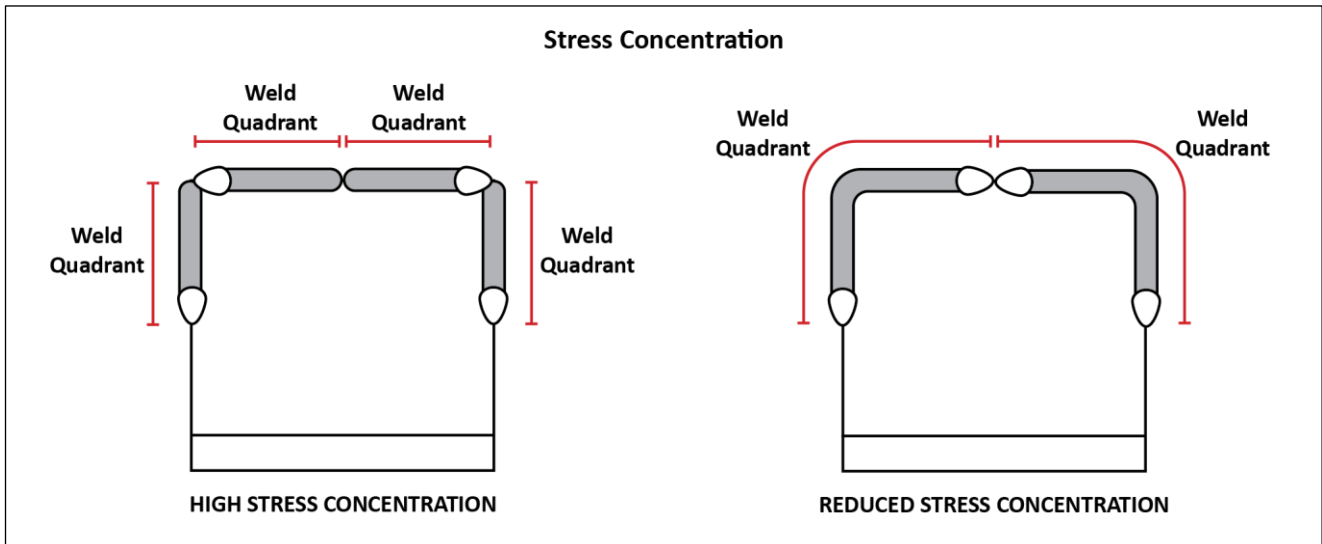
Each weld quadrant is completed by welding through each bend or corner.
